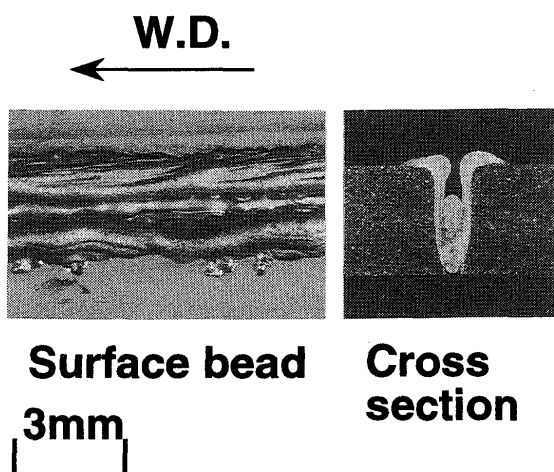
Overlap defect occurs in high speed welding of thin plates.
